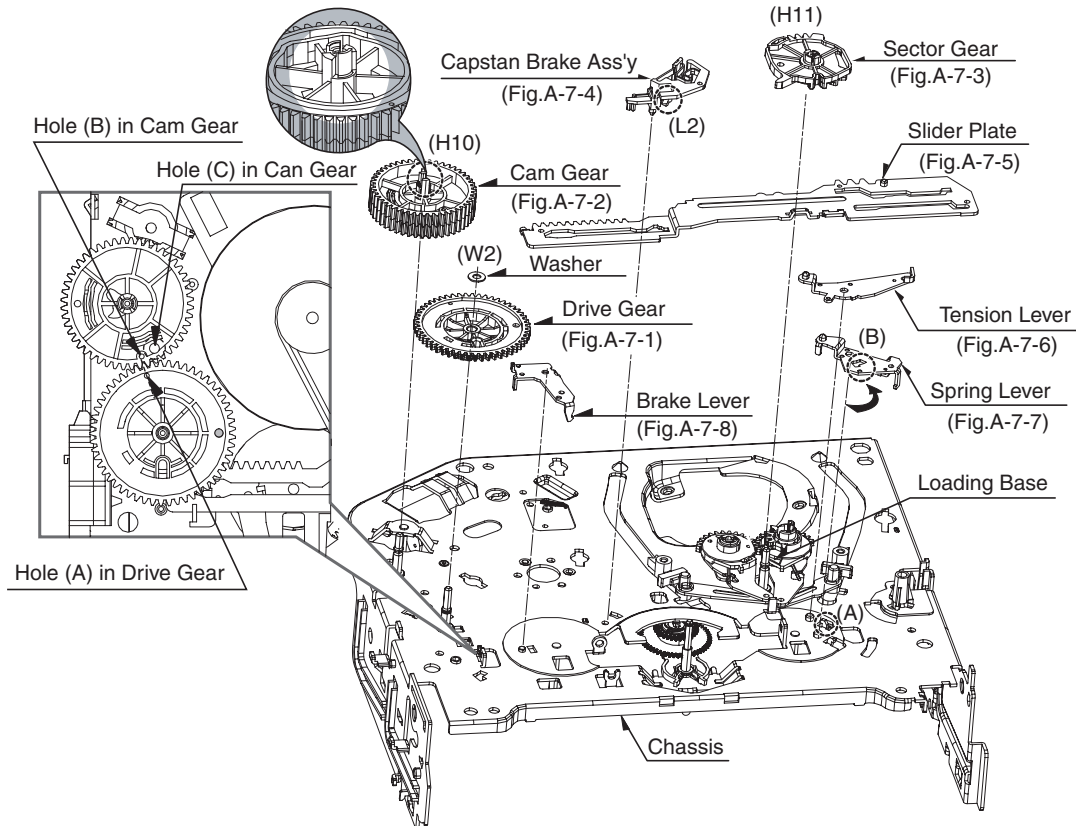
Drive Gear, Cam Gear, Sector Gear, Capstan Brake Ass'y, Slider Plate, Tension Lever, Spring Lever, Brake Lever
